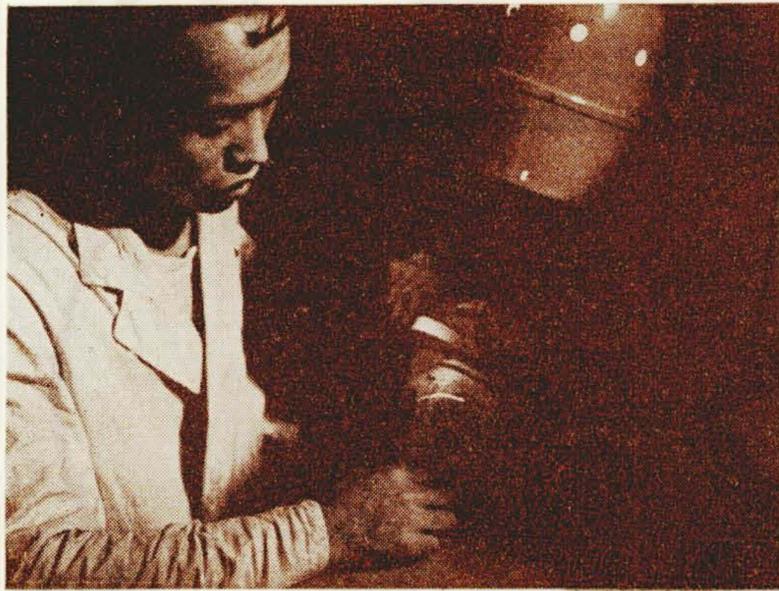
Steel Casting under Inspection by Co⁶⁰ Radiography
